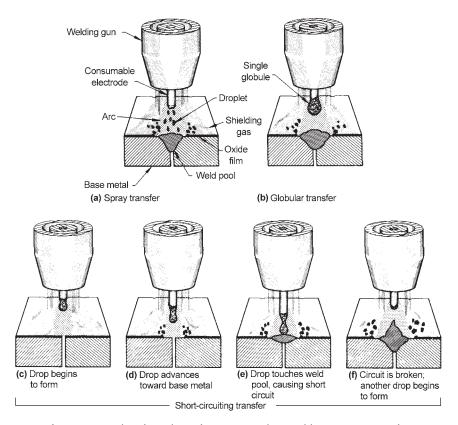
Schematic of gas metal arc welding process. Source: Ref 2.6
